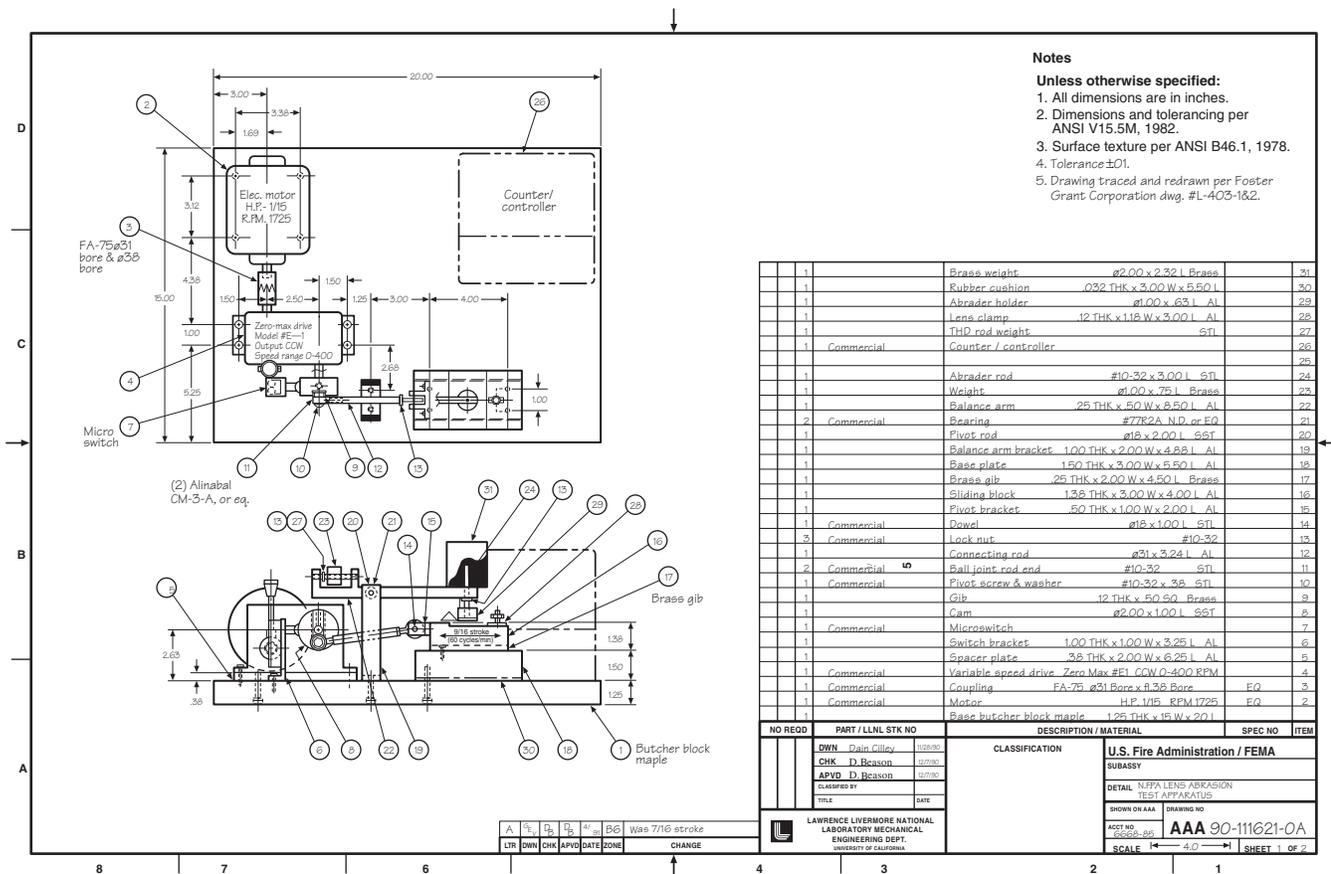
Faceshield/Goggle Component Lens Test Apparatus.
